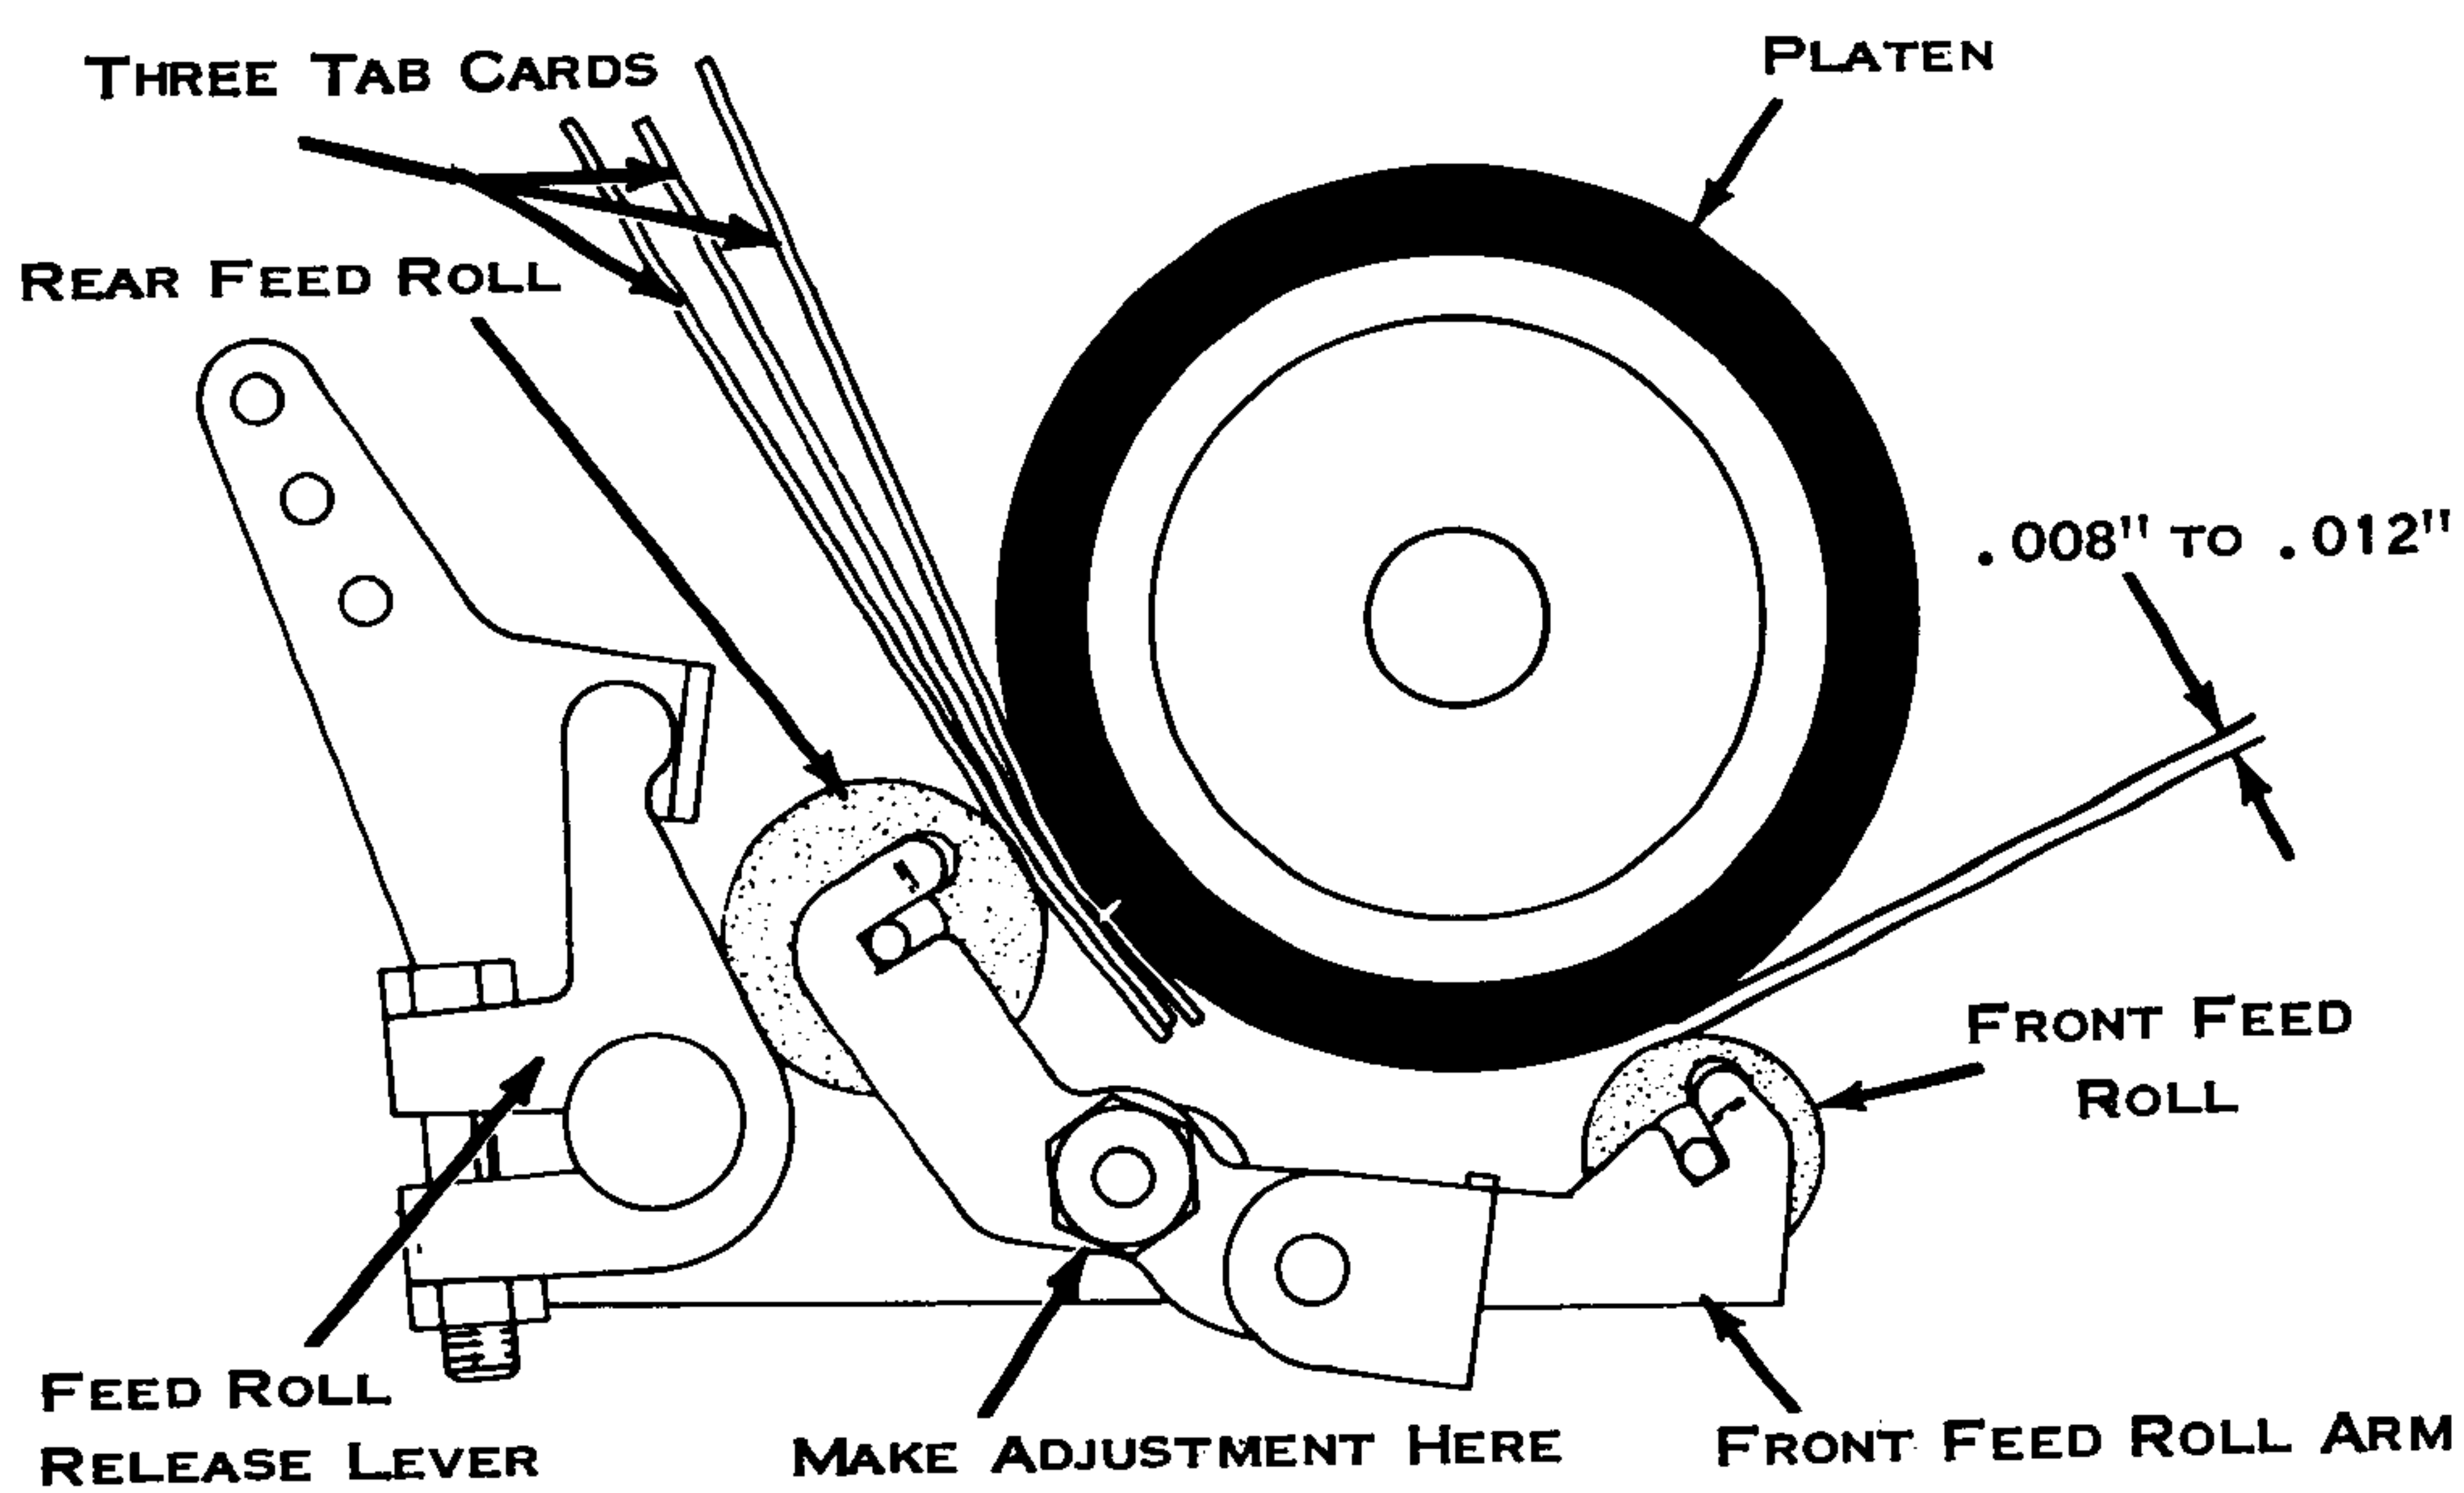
Feed Roll Adjusting Eccentrics (Old Style)
